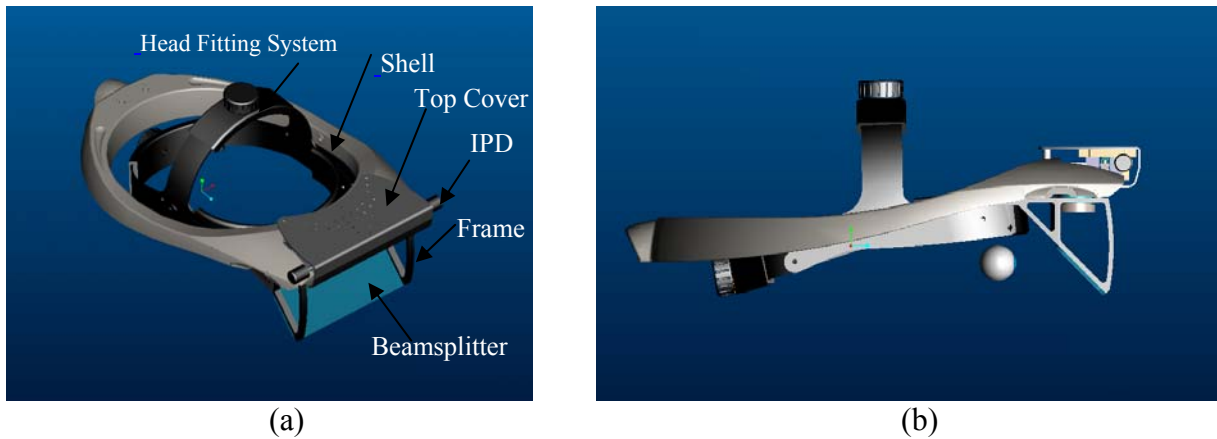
(a) OLED HMPD 3D view ; (b) OLED HMPD Side view
